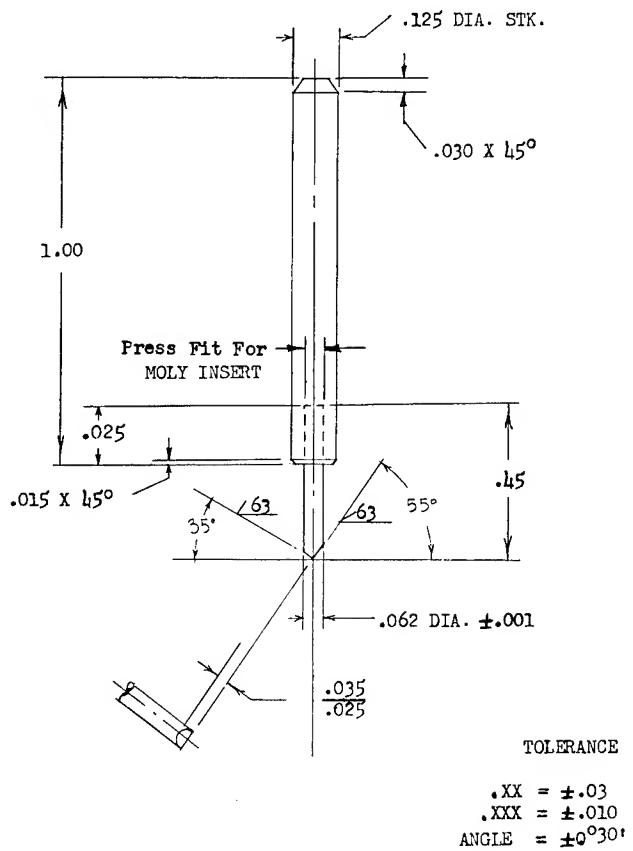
Molybdenum welding tip electrode.
